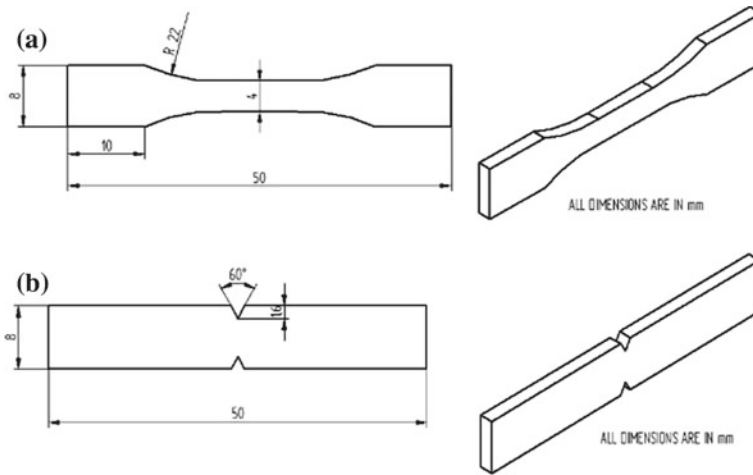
Schematic drawing of tensile specimens, a tensile specimen without notch and b tensile specimen with notch
